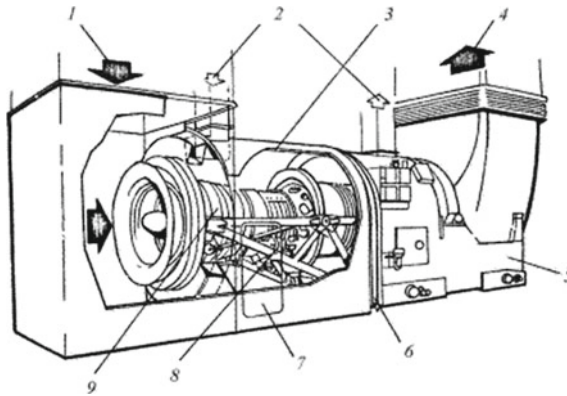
Marine engine “Olympus TM3B” in special box: 1—air intake; 2—engine casing cooling air; 3—special engine box; 4—gas exhaust; 5—power turbine frame; 6—flexible connection; 7—inspection hatch; 8—engine frame; 9—engine
